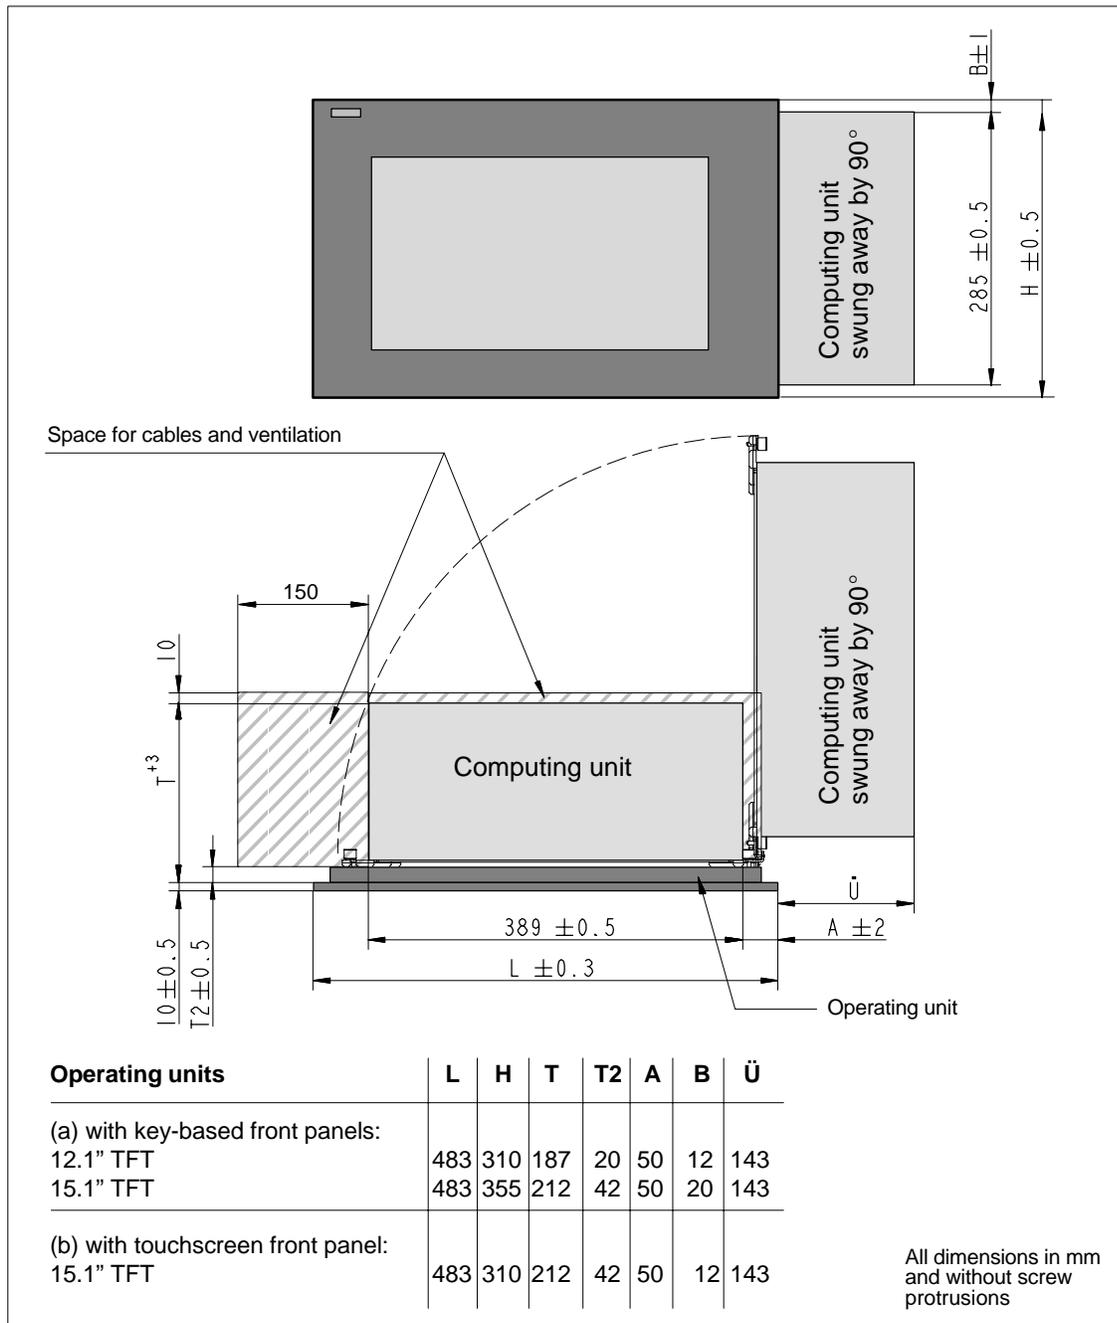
Device dimensions Panel PC 870 in standard mount form factor without a CD-ROM drive
